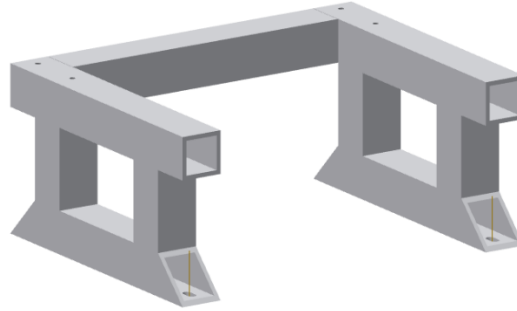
Tubular welded structure composing the upper part of the translating cart
